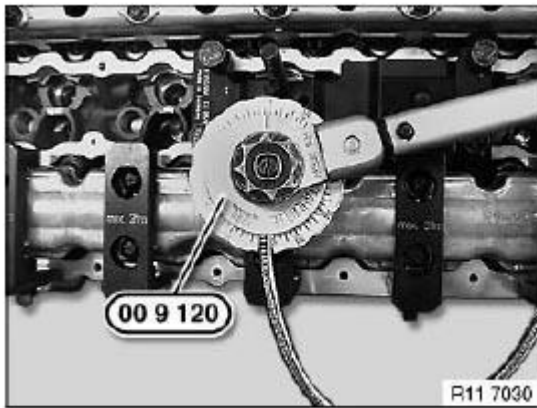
Tightening Banks Using Special Tool 00 9 120
